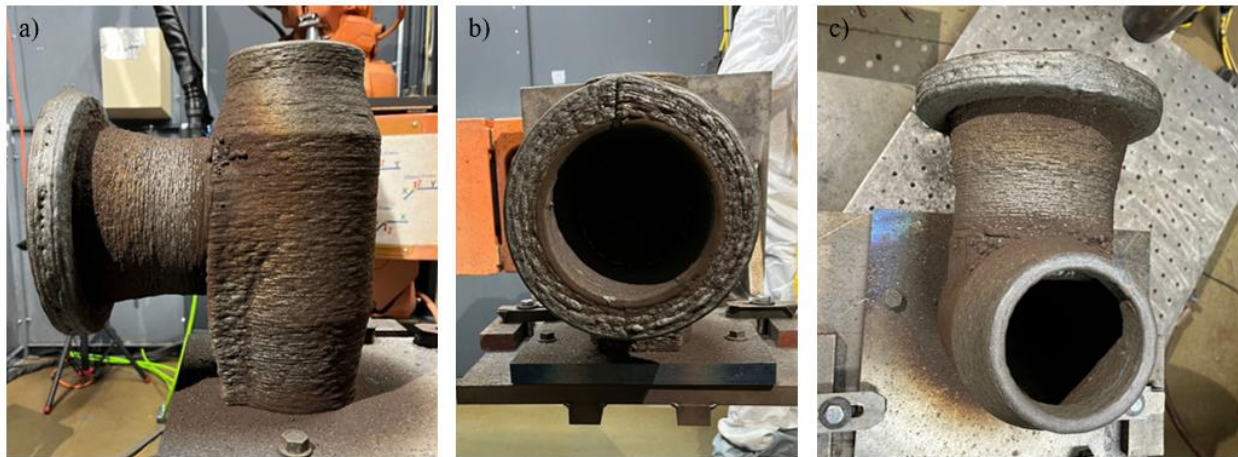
Completed large-scale WA-DED 316L valve body as seen from a) side view, b) the flange section, and c) the top view.
